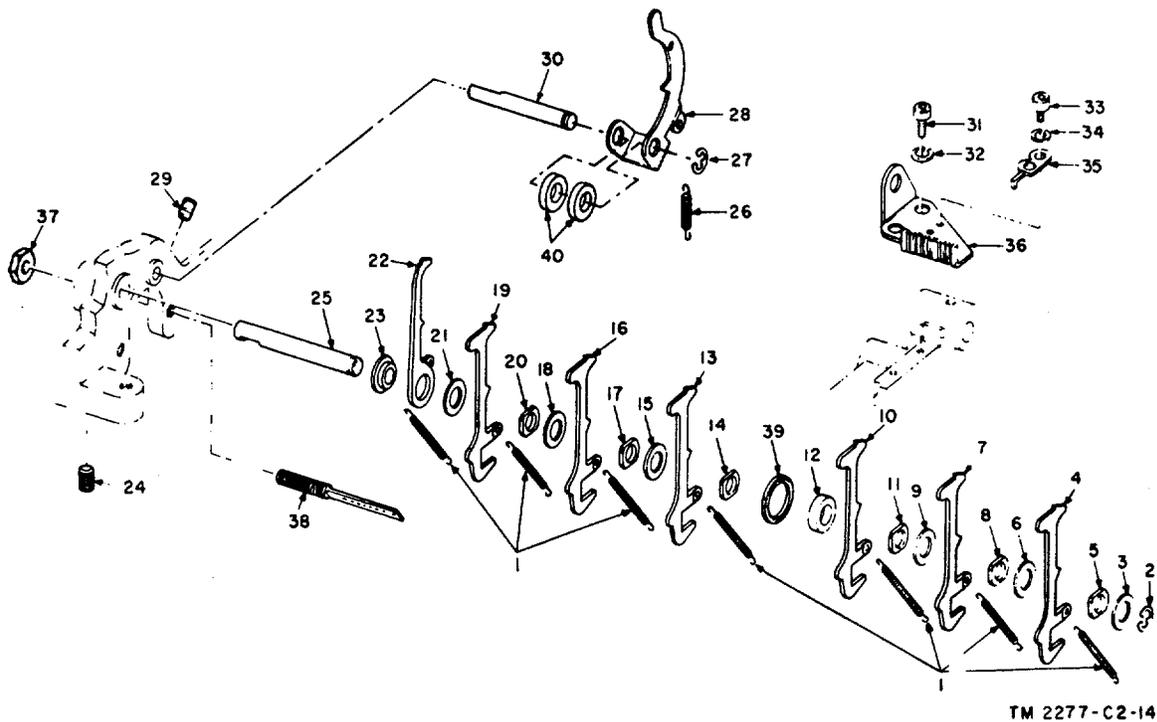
Transmitter-distributor code sensing levers, exploded view.
